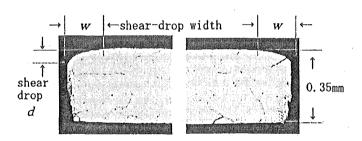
Cross-sectional photograph of a punched motor core at a tooth.
